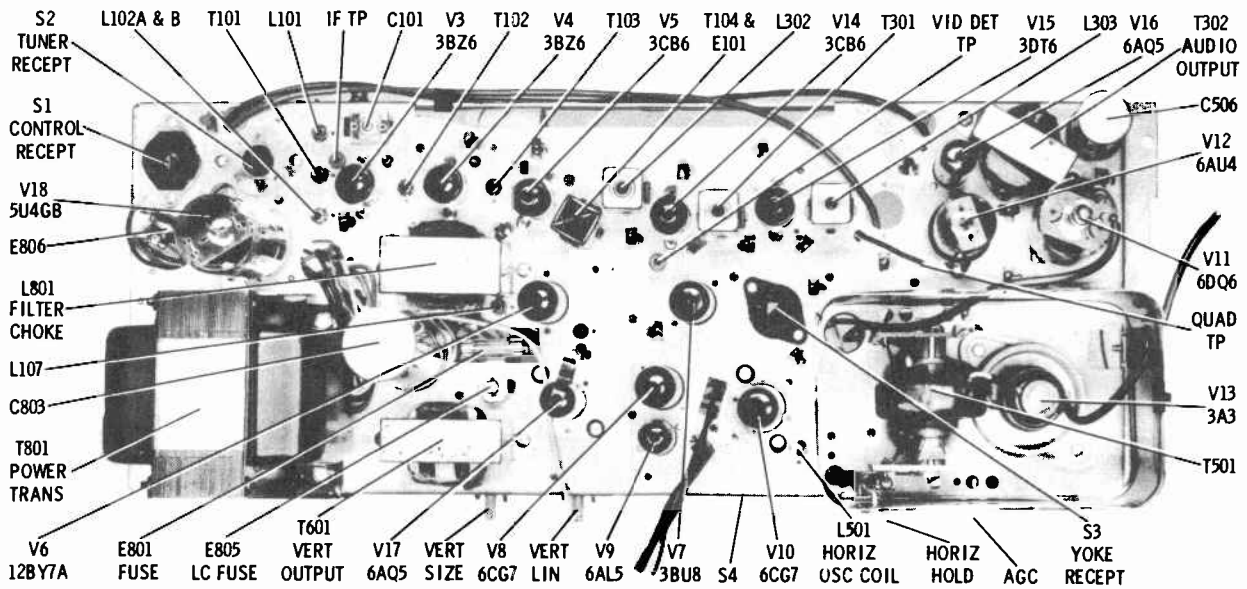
CHASSIS TS-544A-00 PARTS LOCATION
